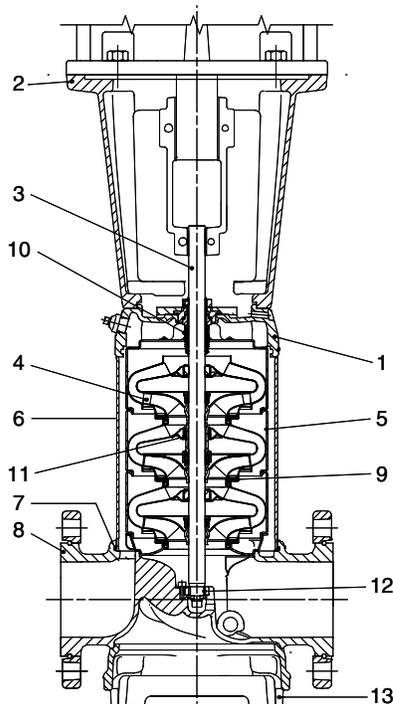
Sectional drawing of a CR(N) 45, 64, 90 pump
